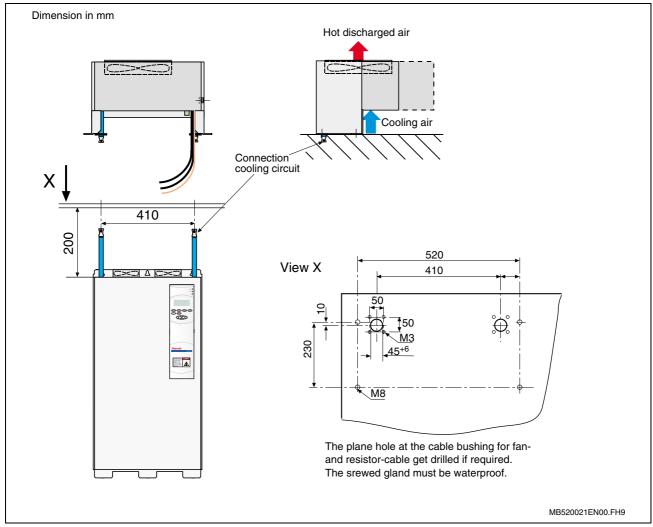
Dimension sheet for cabinet roof mounting, size class G
